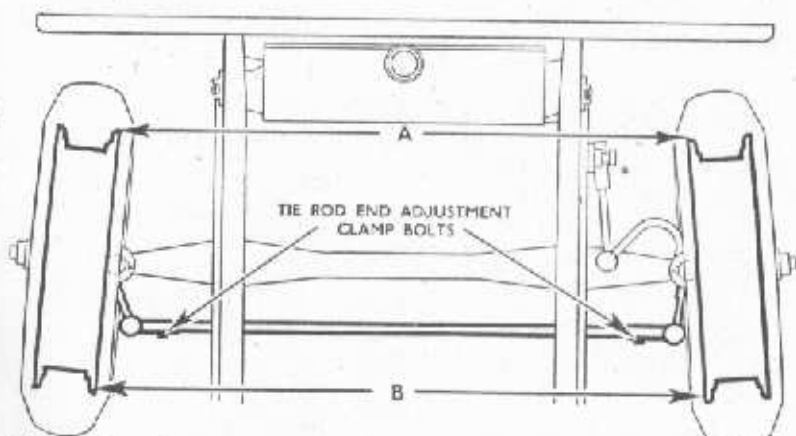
Front wheel alignment diagram. The wheels should "toe-in" $\frac{1}{8}$ in. to $\frac{3}{16}$ in., measured at points "A" and "B".
